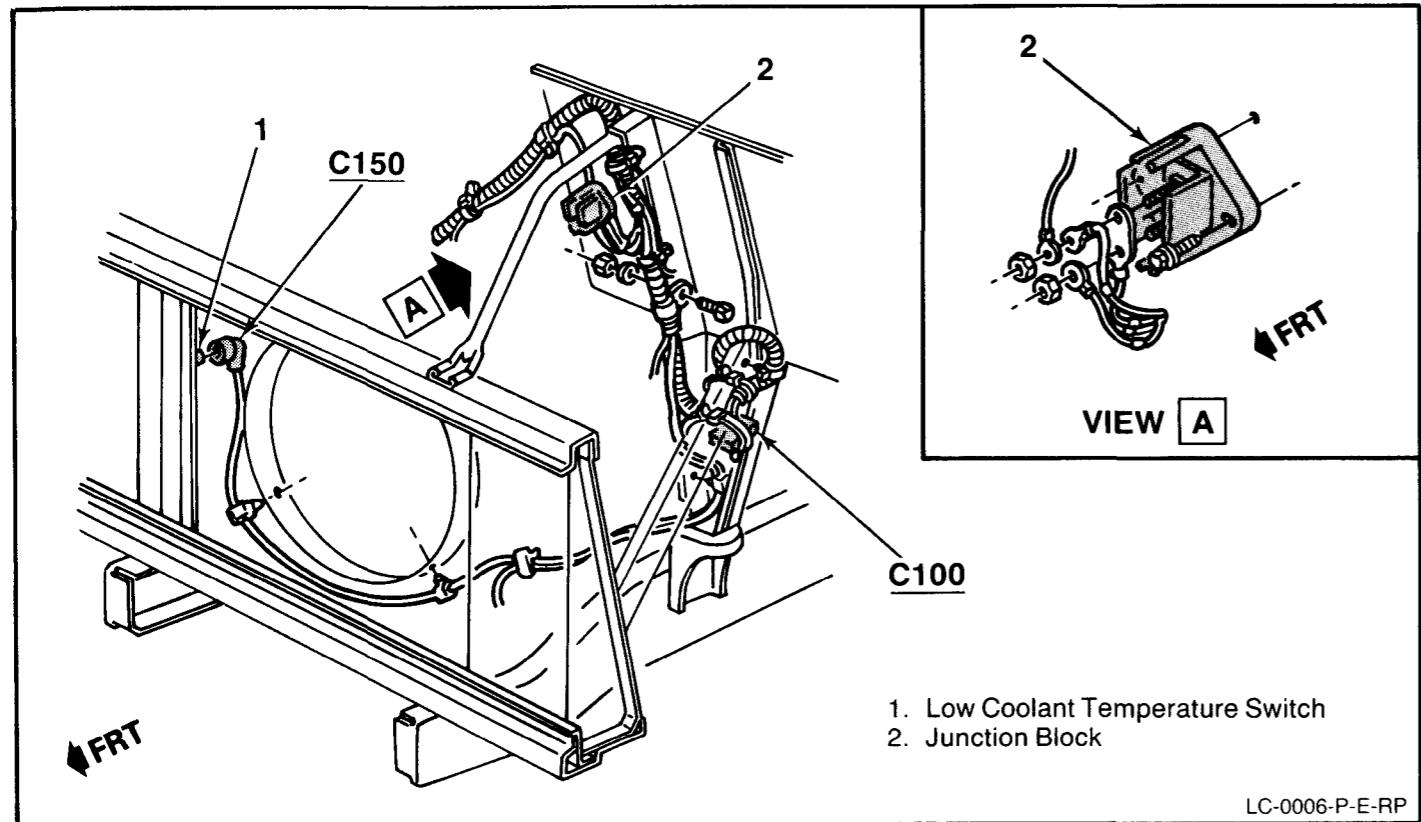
Engine Wiring Harness to Cowl/Radiator (RPO LL4 w/P42)
